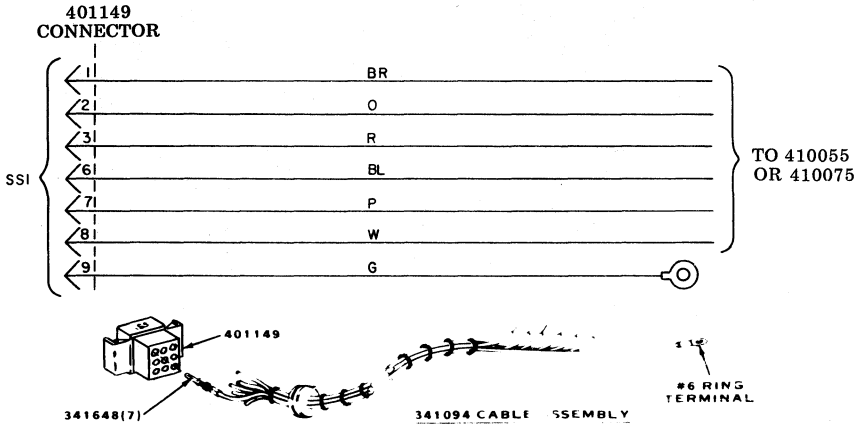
341094 Cable Assembly for Early Design 40K101 and 40K104 Opcons
